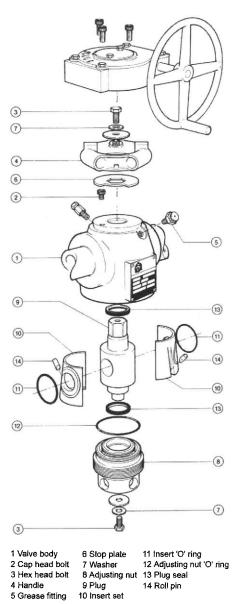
Typical oil-field high pressure lubricated plug valve Courtesy of Anson Ltd
